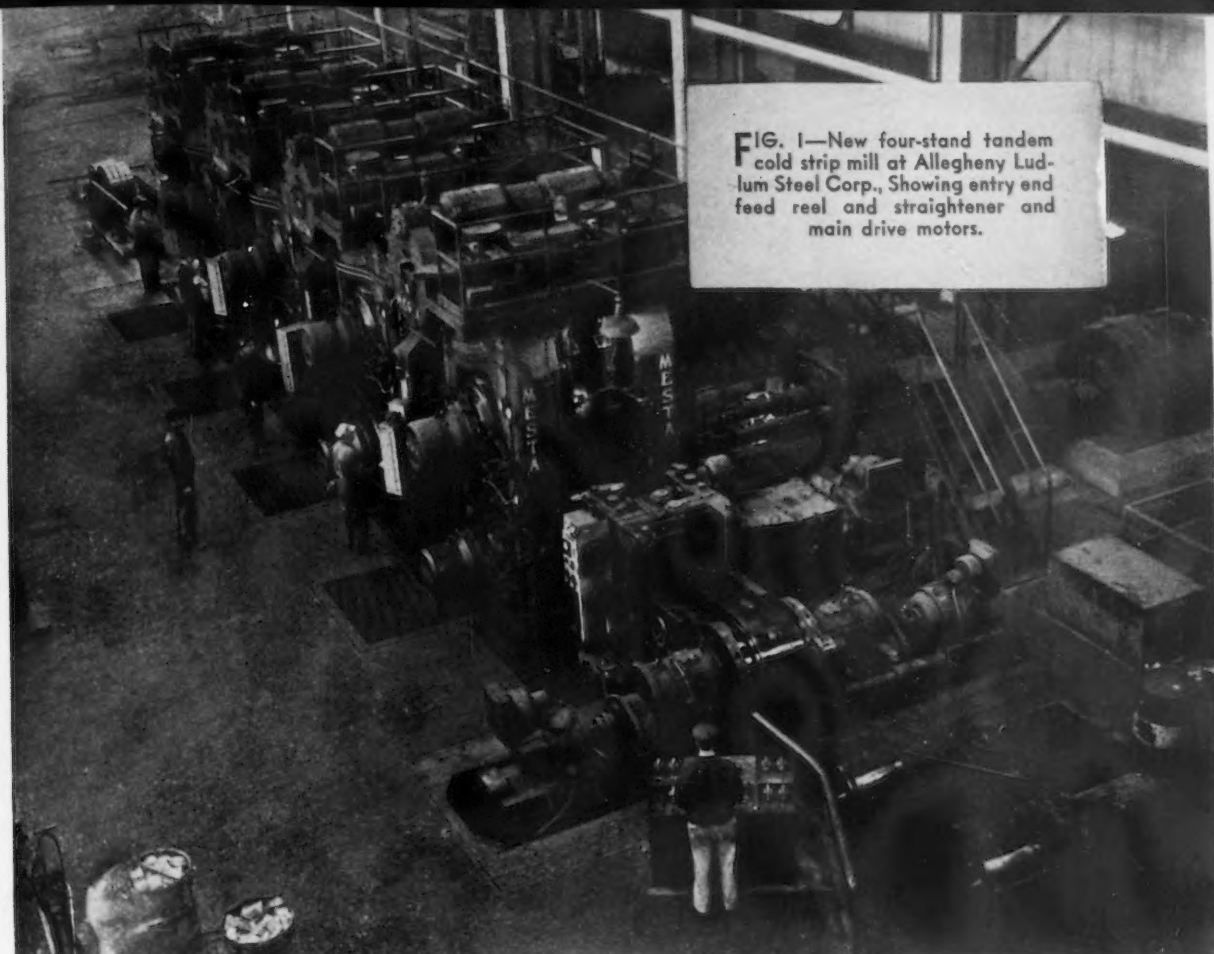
New four-stand tandem cold strip mill at Allegheny Ludlum Steel Corp., Showing entry end feed reel and straightener and main drive motors.
